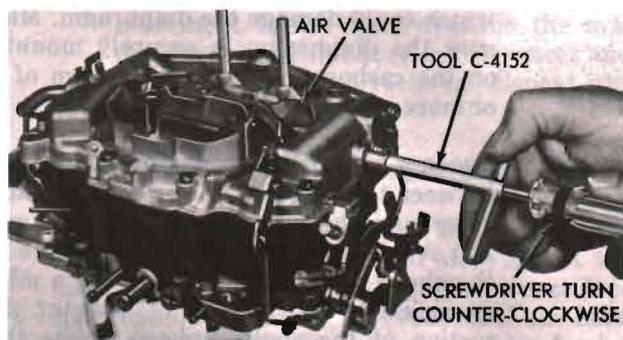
Adjusting Air Valve Spring Tension—Slide 2189 & 2190
